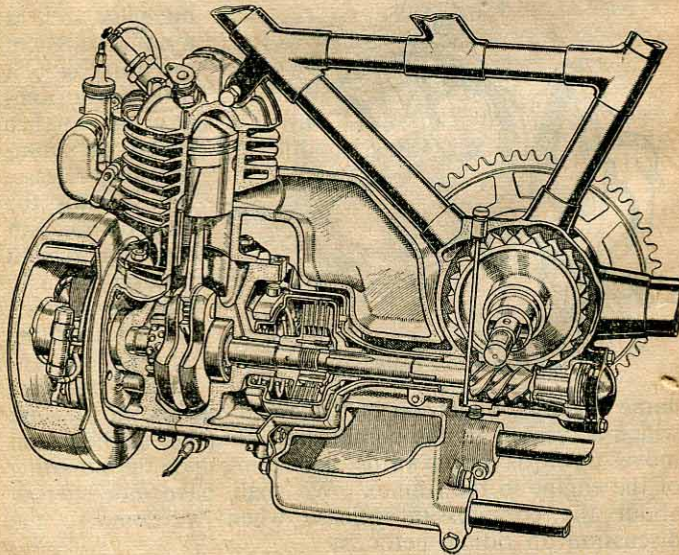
Detail construction of the Scott engine fitted to the Cyc-Auto. This machine has a worm gear as the primary drive
